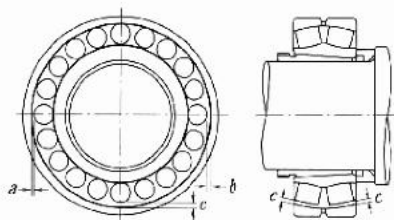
Measuring Clearance in Large Spherical Roller Bearing
